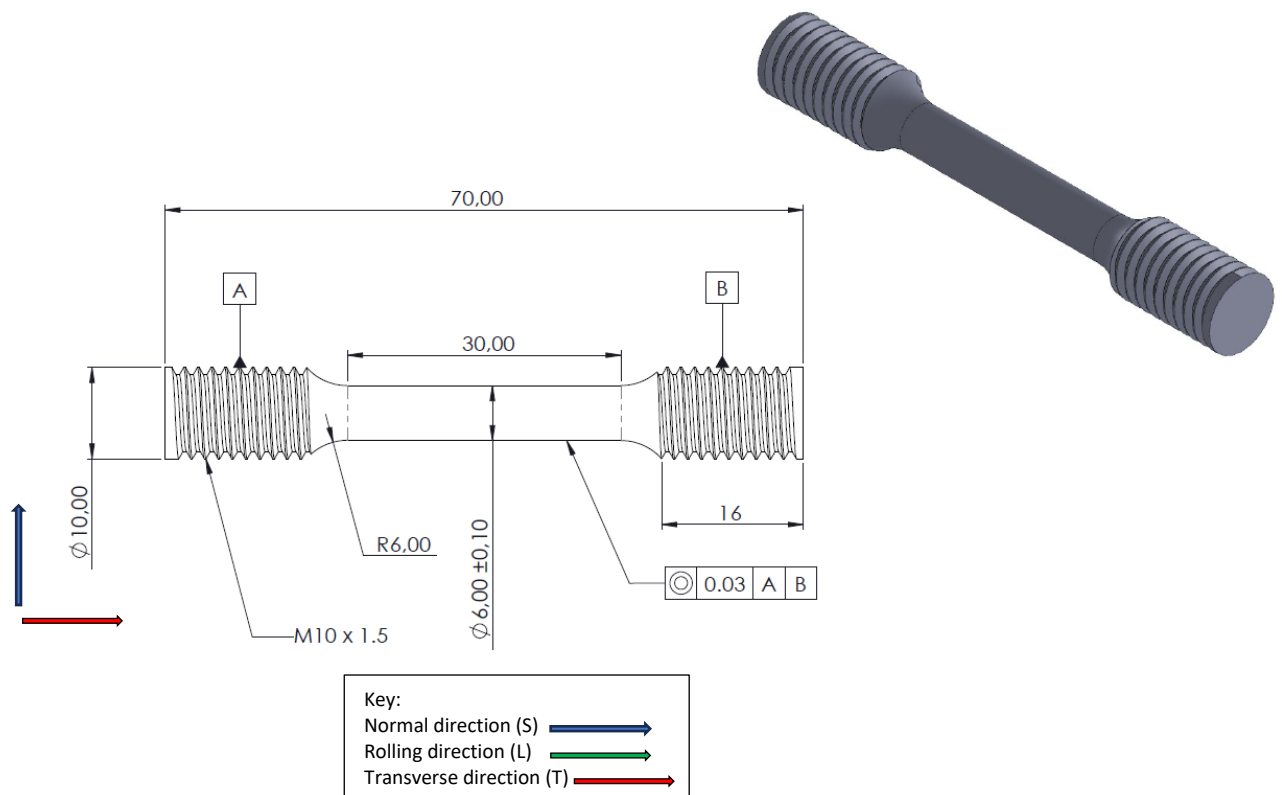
Drawing for ASTM E8 Tensile specimen showing S-T plane orientation for side profile
